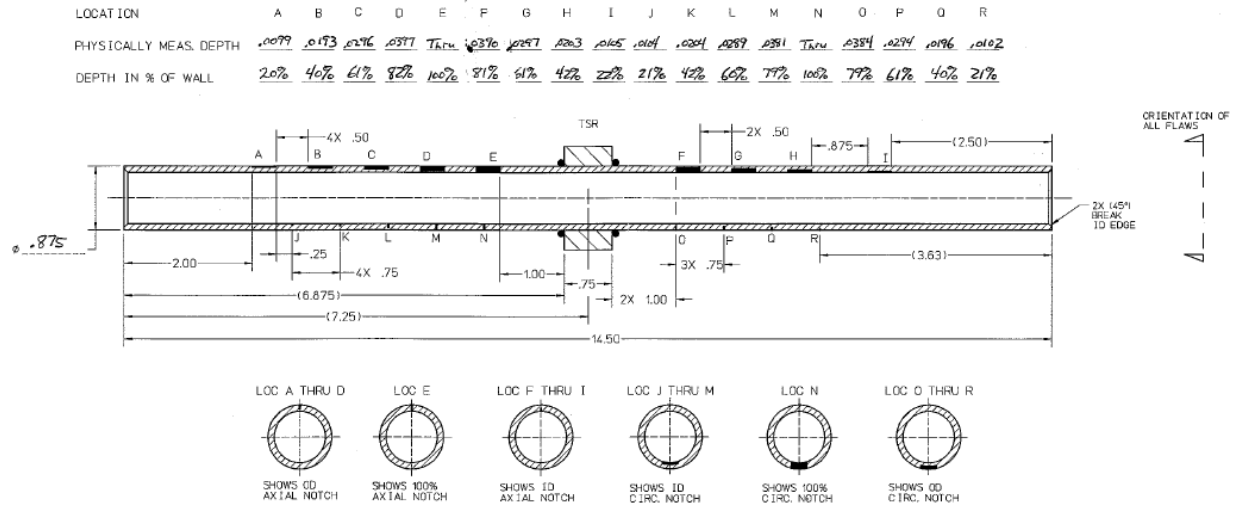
Drawing of EDM Notch Standard Tube Used for Calibration of Rotating Probe Data.
